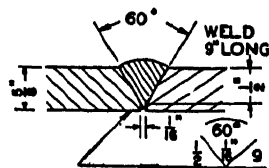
Single-welded V Butt Joint Nomenclature.
